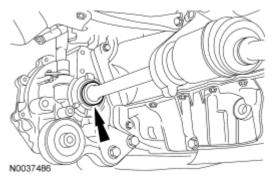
Locating RH Halfshaft Into Transaxle Courtesy of FORD MOTOR CO.
